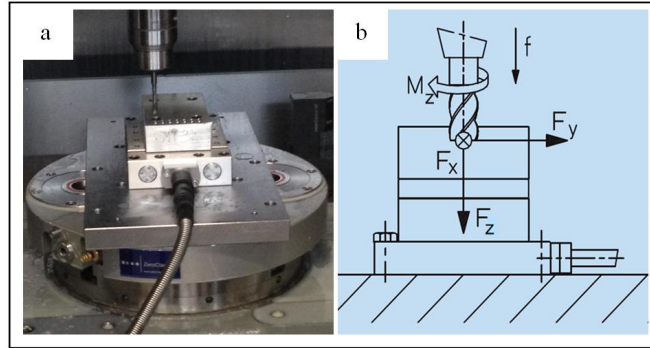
(a) Experimental setup with dynamometer, work piece and tool; (b) Direction of cutting forces.
